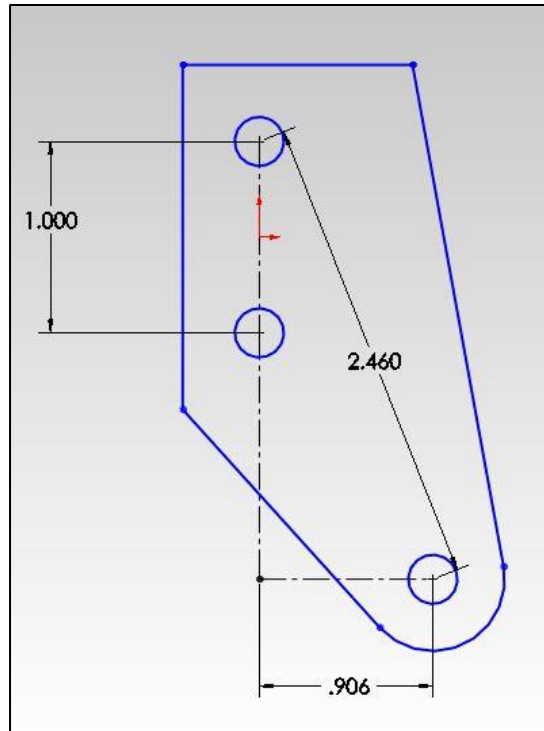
Top View of Left Front Upright Lower Clevis Plate
